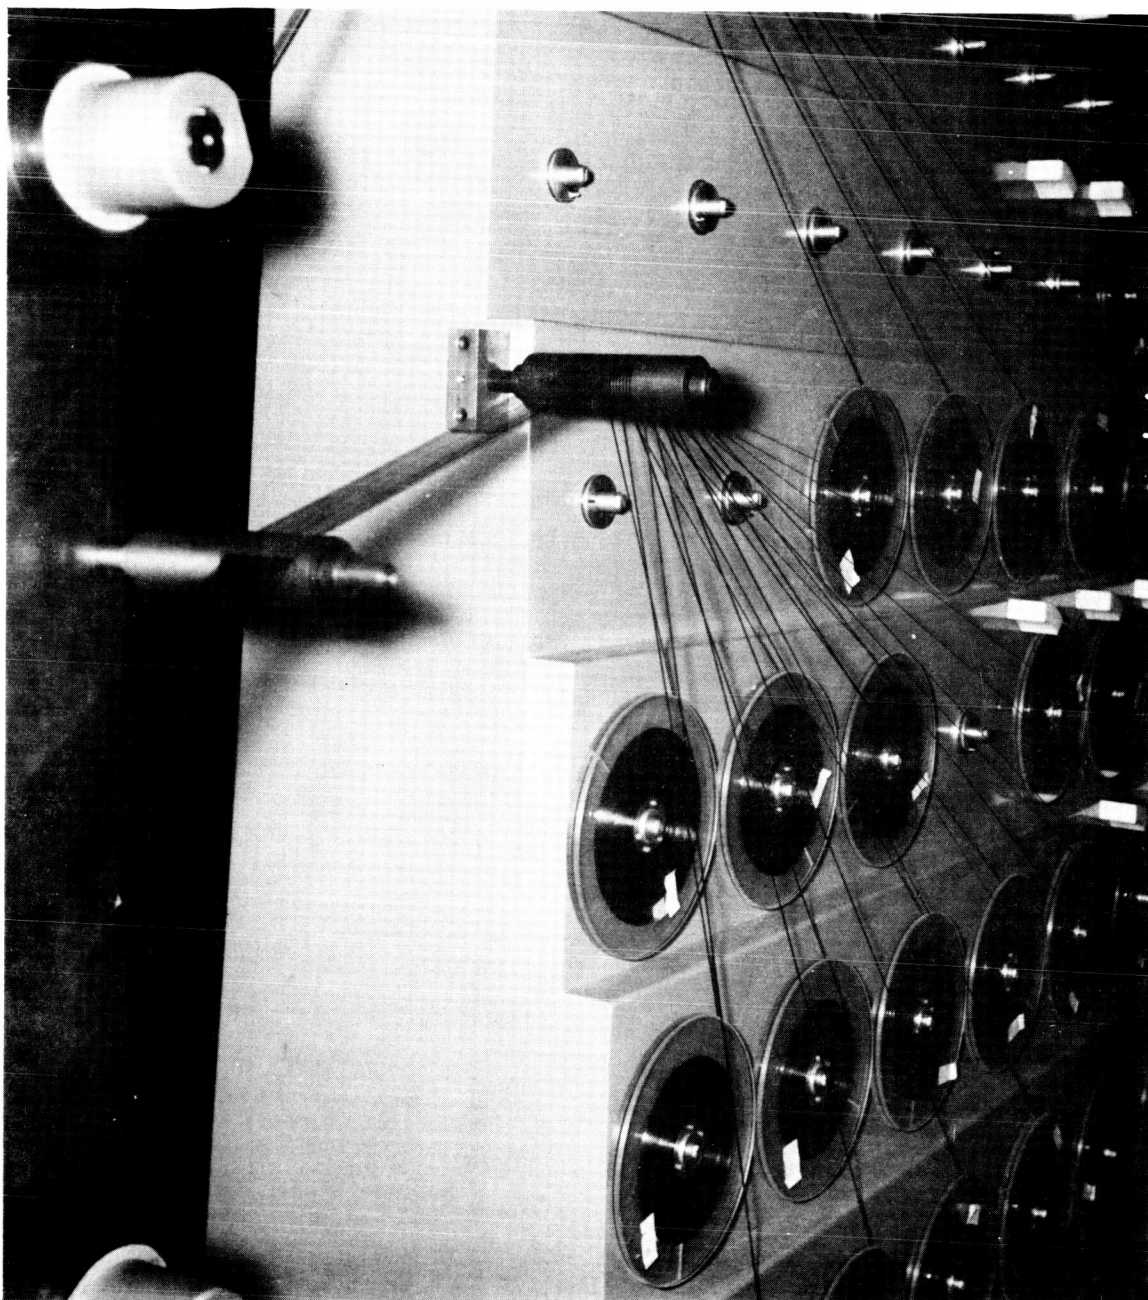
VIEW OF SCHJELDAHL LAMINATOR
